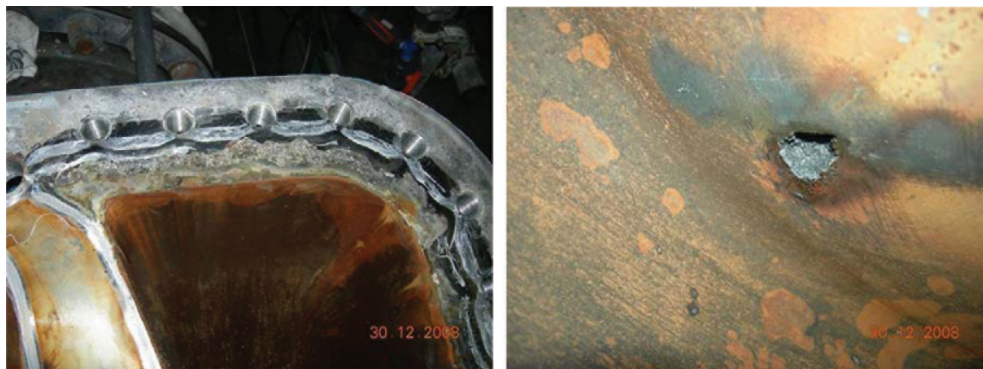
Crevice (a) and pitting (b) corrosion of pump made of cast super duplex stainless steel ASTM A890 Gr5A).
